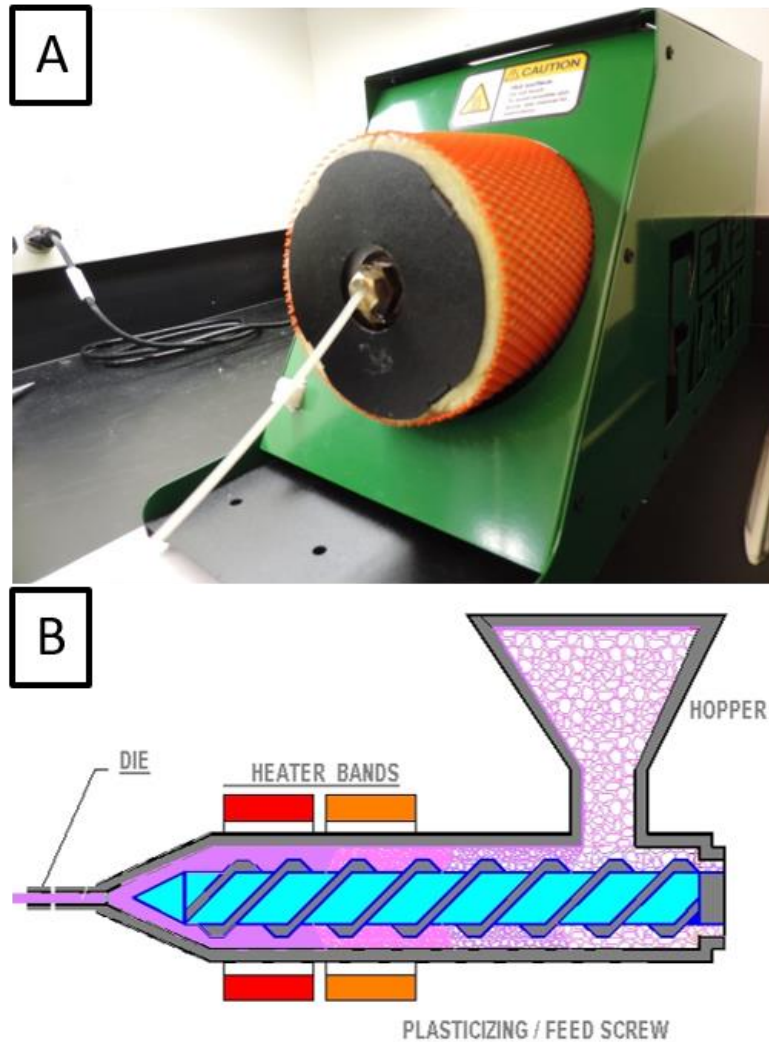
(A) Filabot EX2 used to fabricated the filaments for 3D printing. (B) Schematic showing the internal part of a single screw filament extruder [102].
